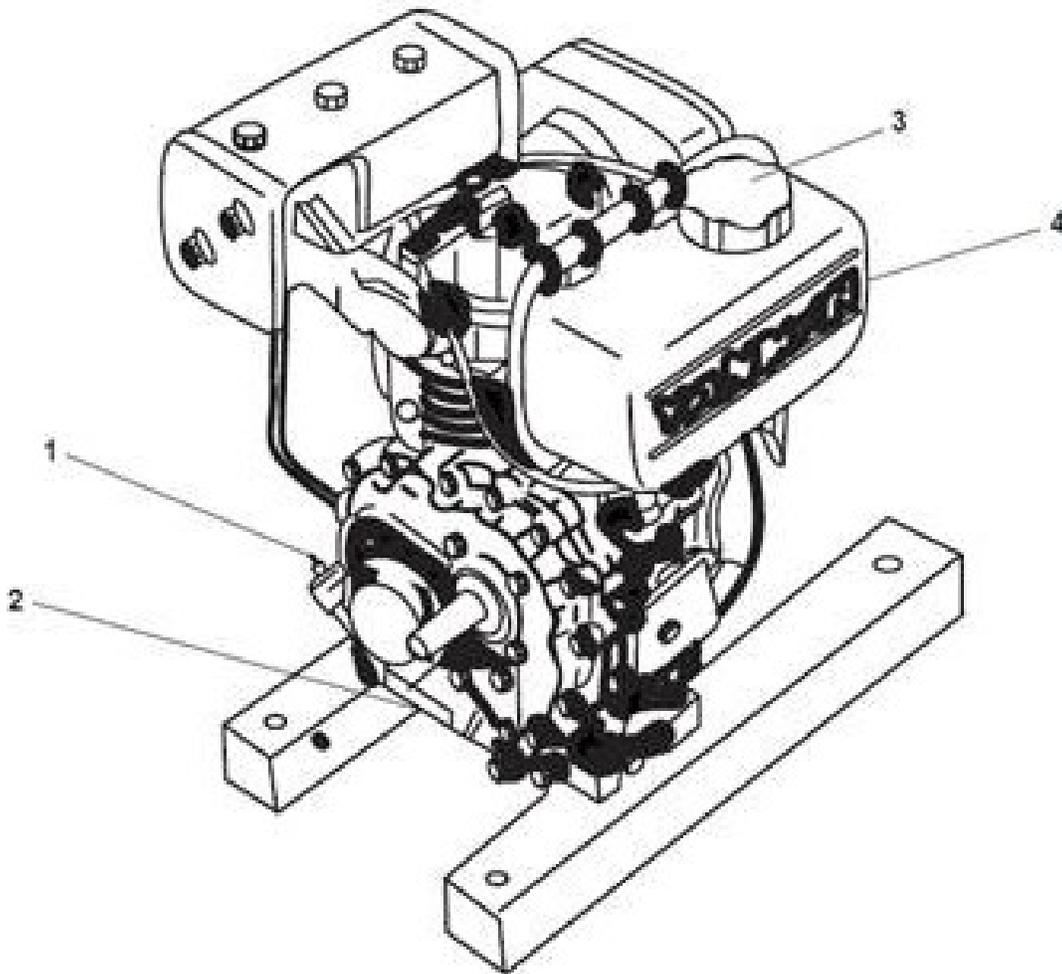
ST-1018_06 (Portable Dewatering Pump with the Pump End and Cage Removed for Clarity)
